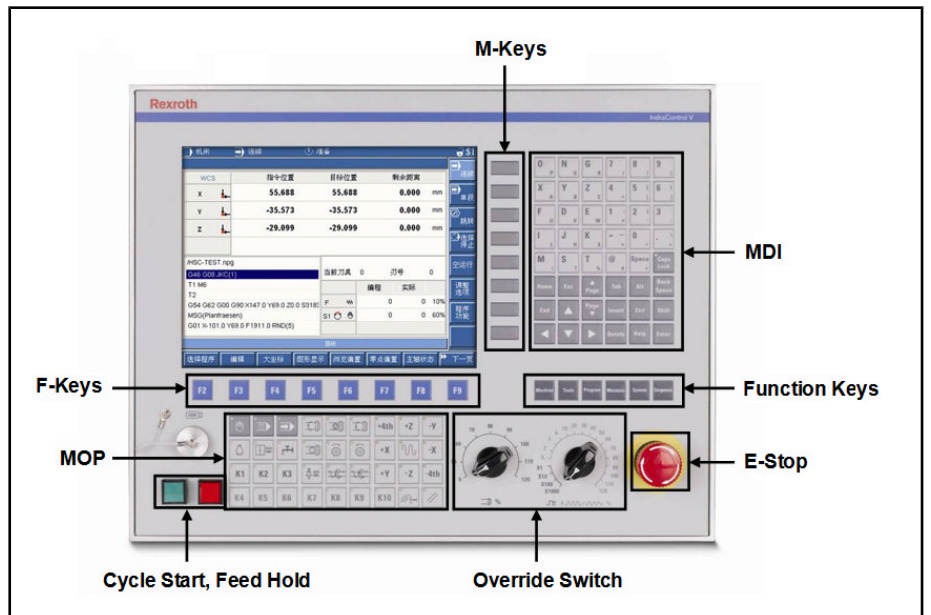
Keyboard layout on the HMI operator panel VDP 80.1, CNC milling
